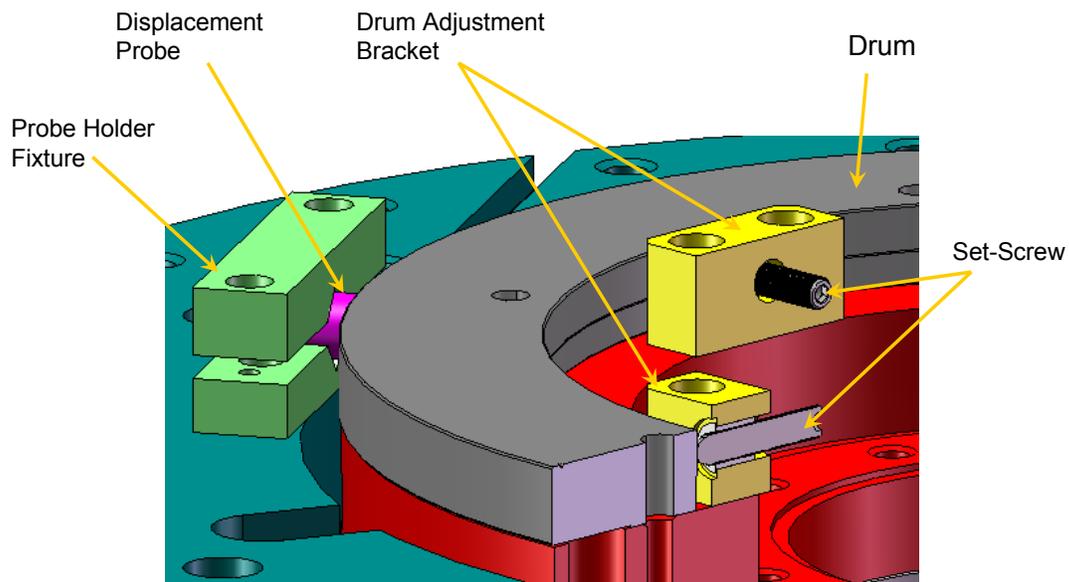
Section-view of the encoder drum adjustment mechanism
